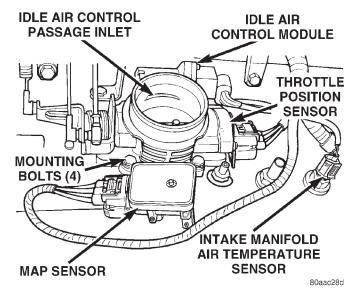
Intake Manifold Air Temperature Sensor— 4.0L Engine
